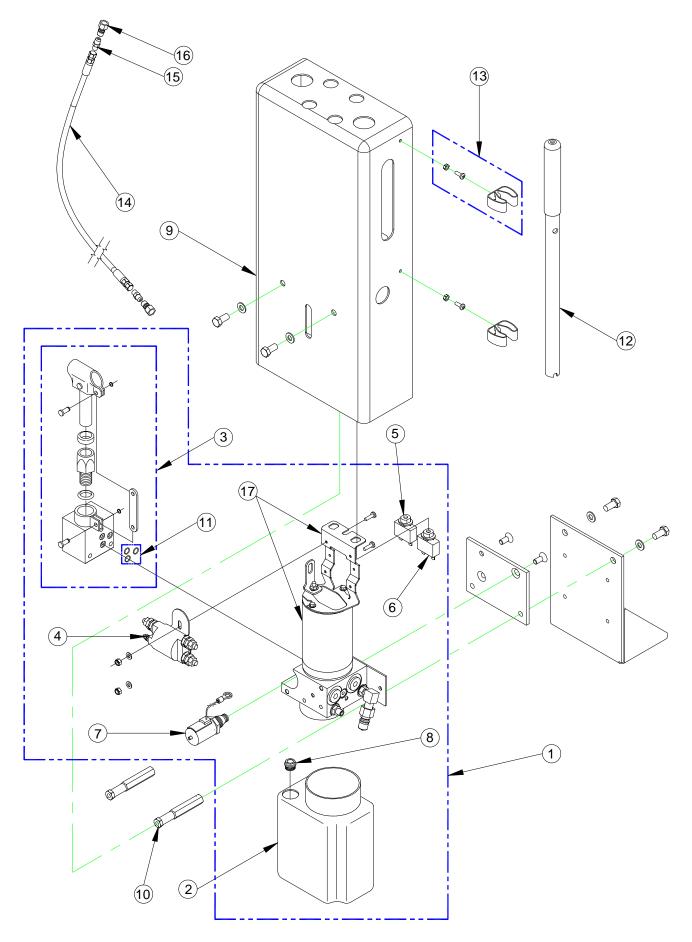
HYDRAULIC PUMP ASSEMBLY
